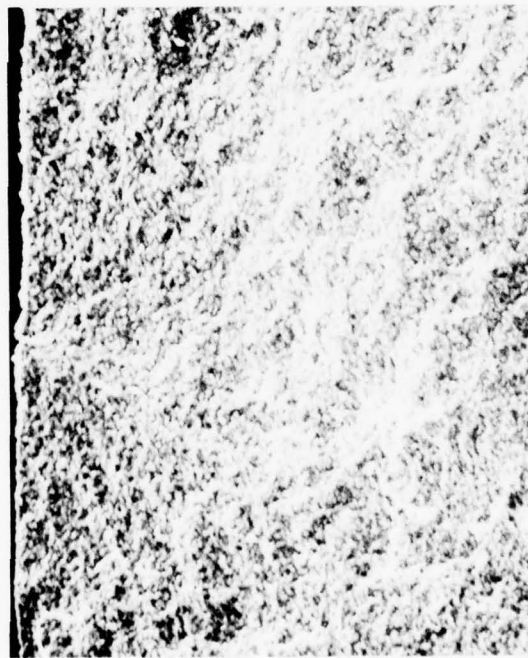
Fracture Surfaces of Ceralloy 147A Specimen 2 Showing Fracture Initiation Site.
